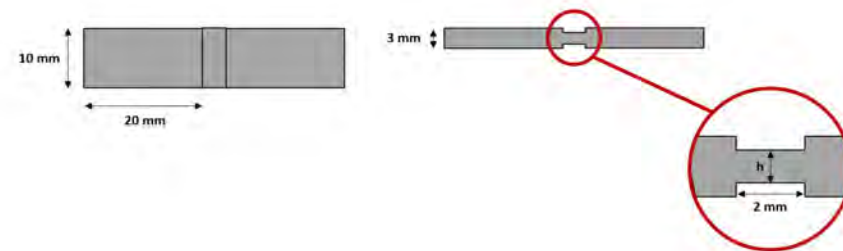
Measurements of the test sample, top view (left) and side view with hinge detail (right)
